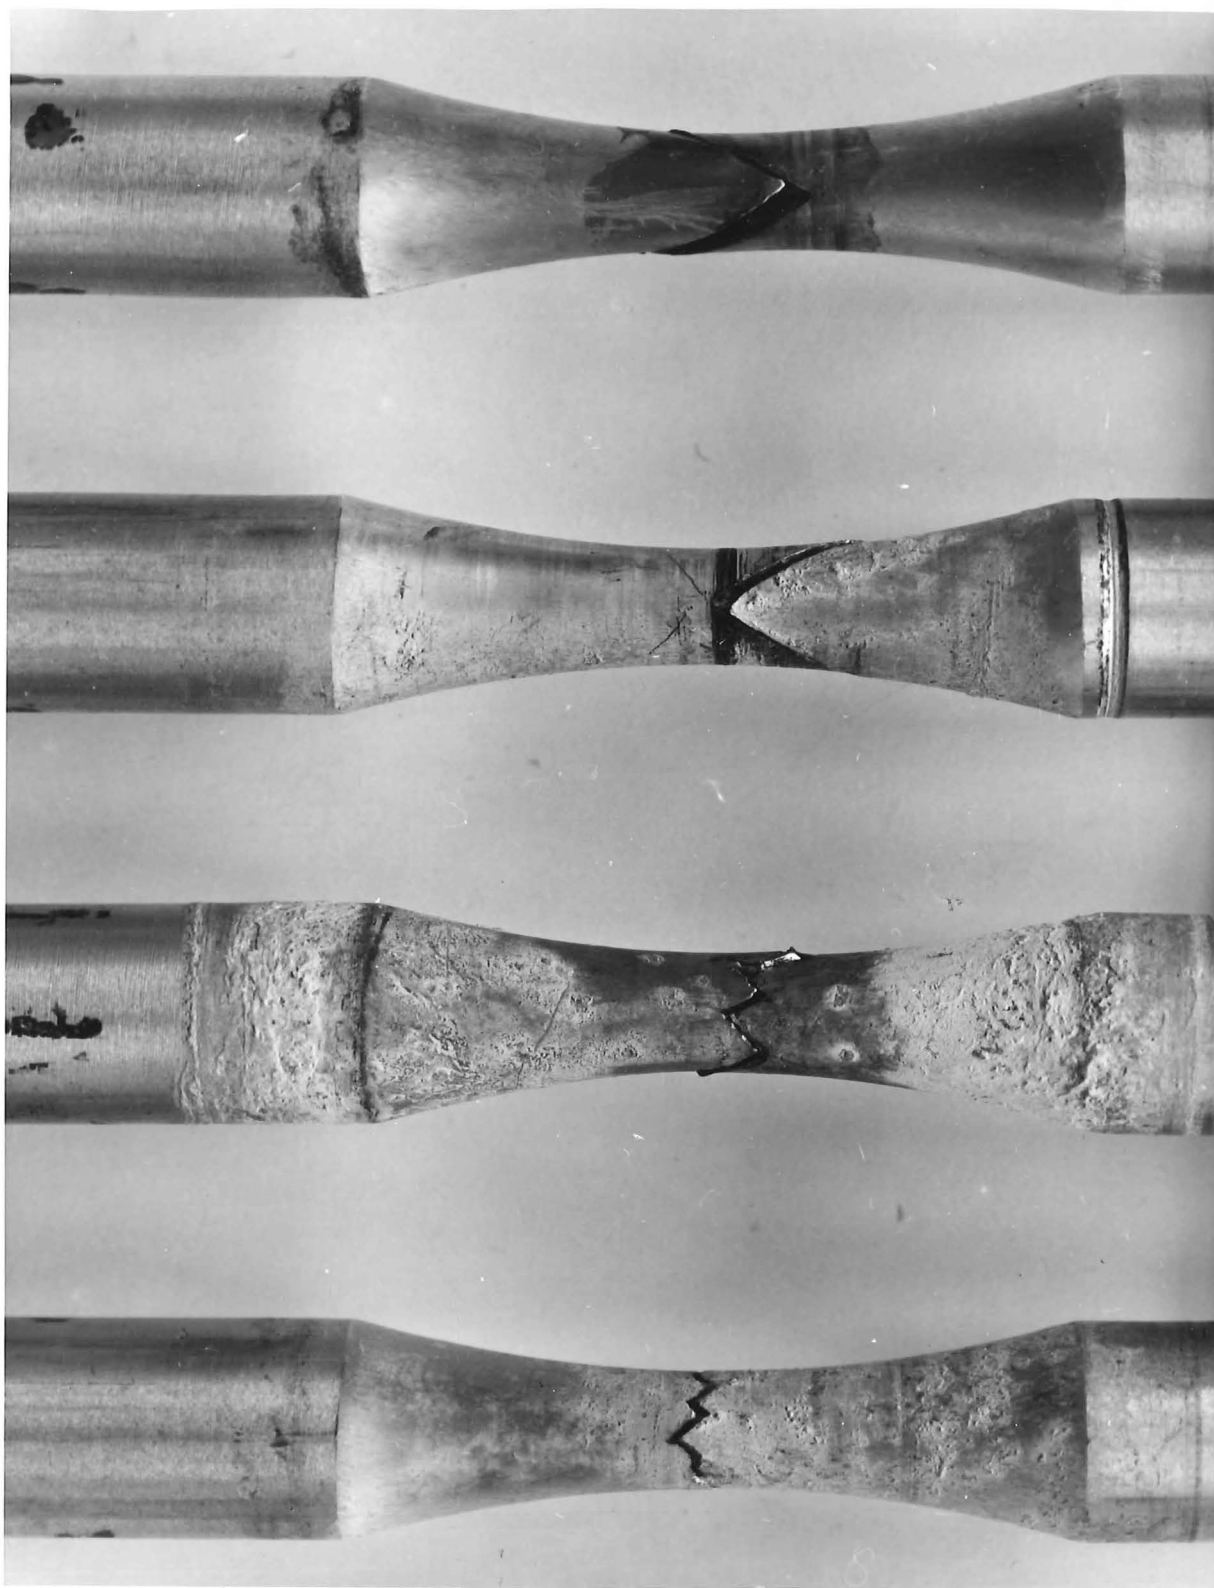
/10: Corrosion fatigue fractures. Stress level highest at top of the photograph and lowest at the bottom.
